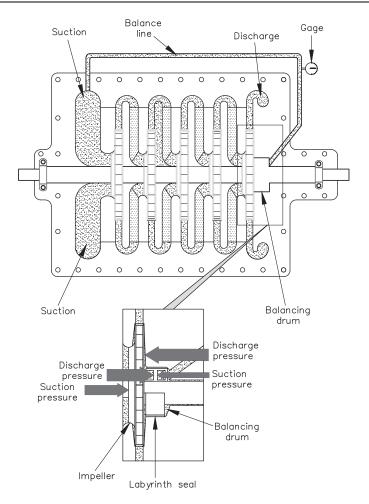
Cutaway illustrating the forces across the balancing drum balance each other.
